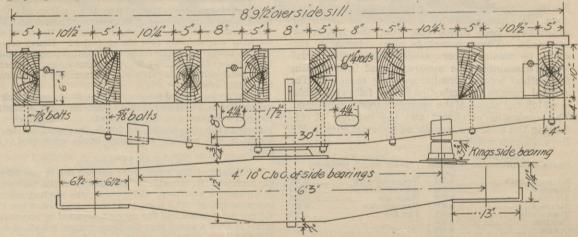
SECTION SHOWING SILLS, BODY AND TRUCK BOLSTERS.
